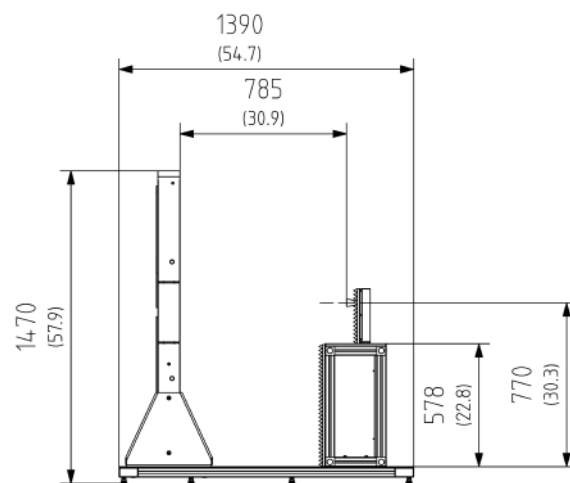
R&S QAR test setup with platform, mounting table and transmitter module
